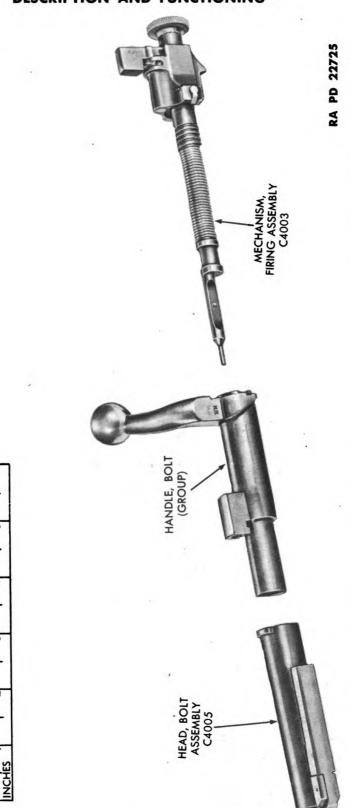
Bolt Subassemblies of U.S. Rifle, Cal. .22, M2 – Exploded View
